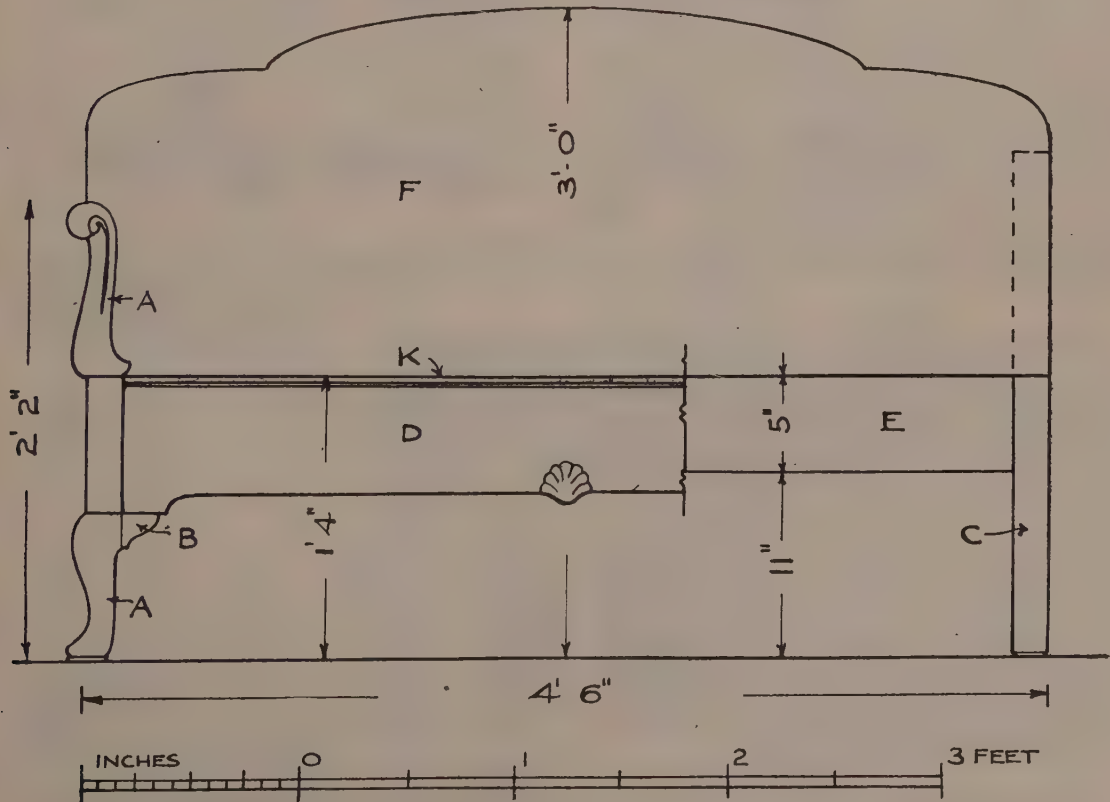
ELEVATION OF 4 FT. 6 IN. BEDSTEAD, WITH SCALE.
